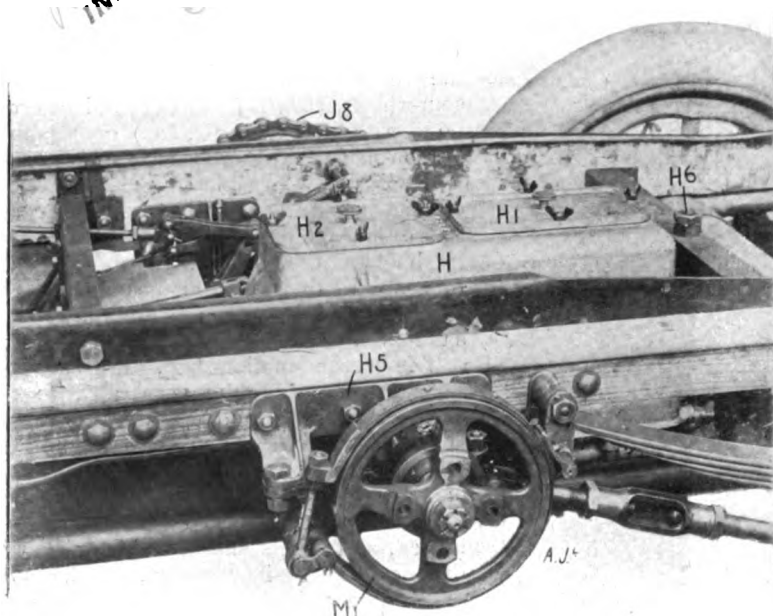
The central portion of the 28-36-h.p. Daimler Chassis, from the left, with the sprocket on that side removed to show the brake-drum on the countershaft.
